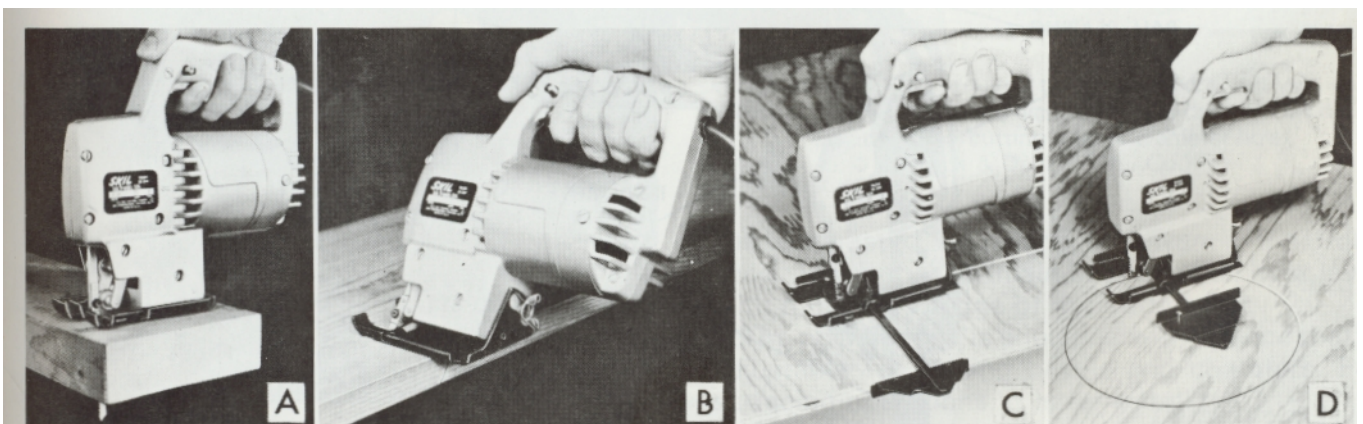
How to use a saber saw. A—Straight cutting. B—Angle cutting. C—Using a fence. D—Using a circle cutting guide (Skil Corp.)
